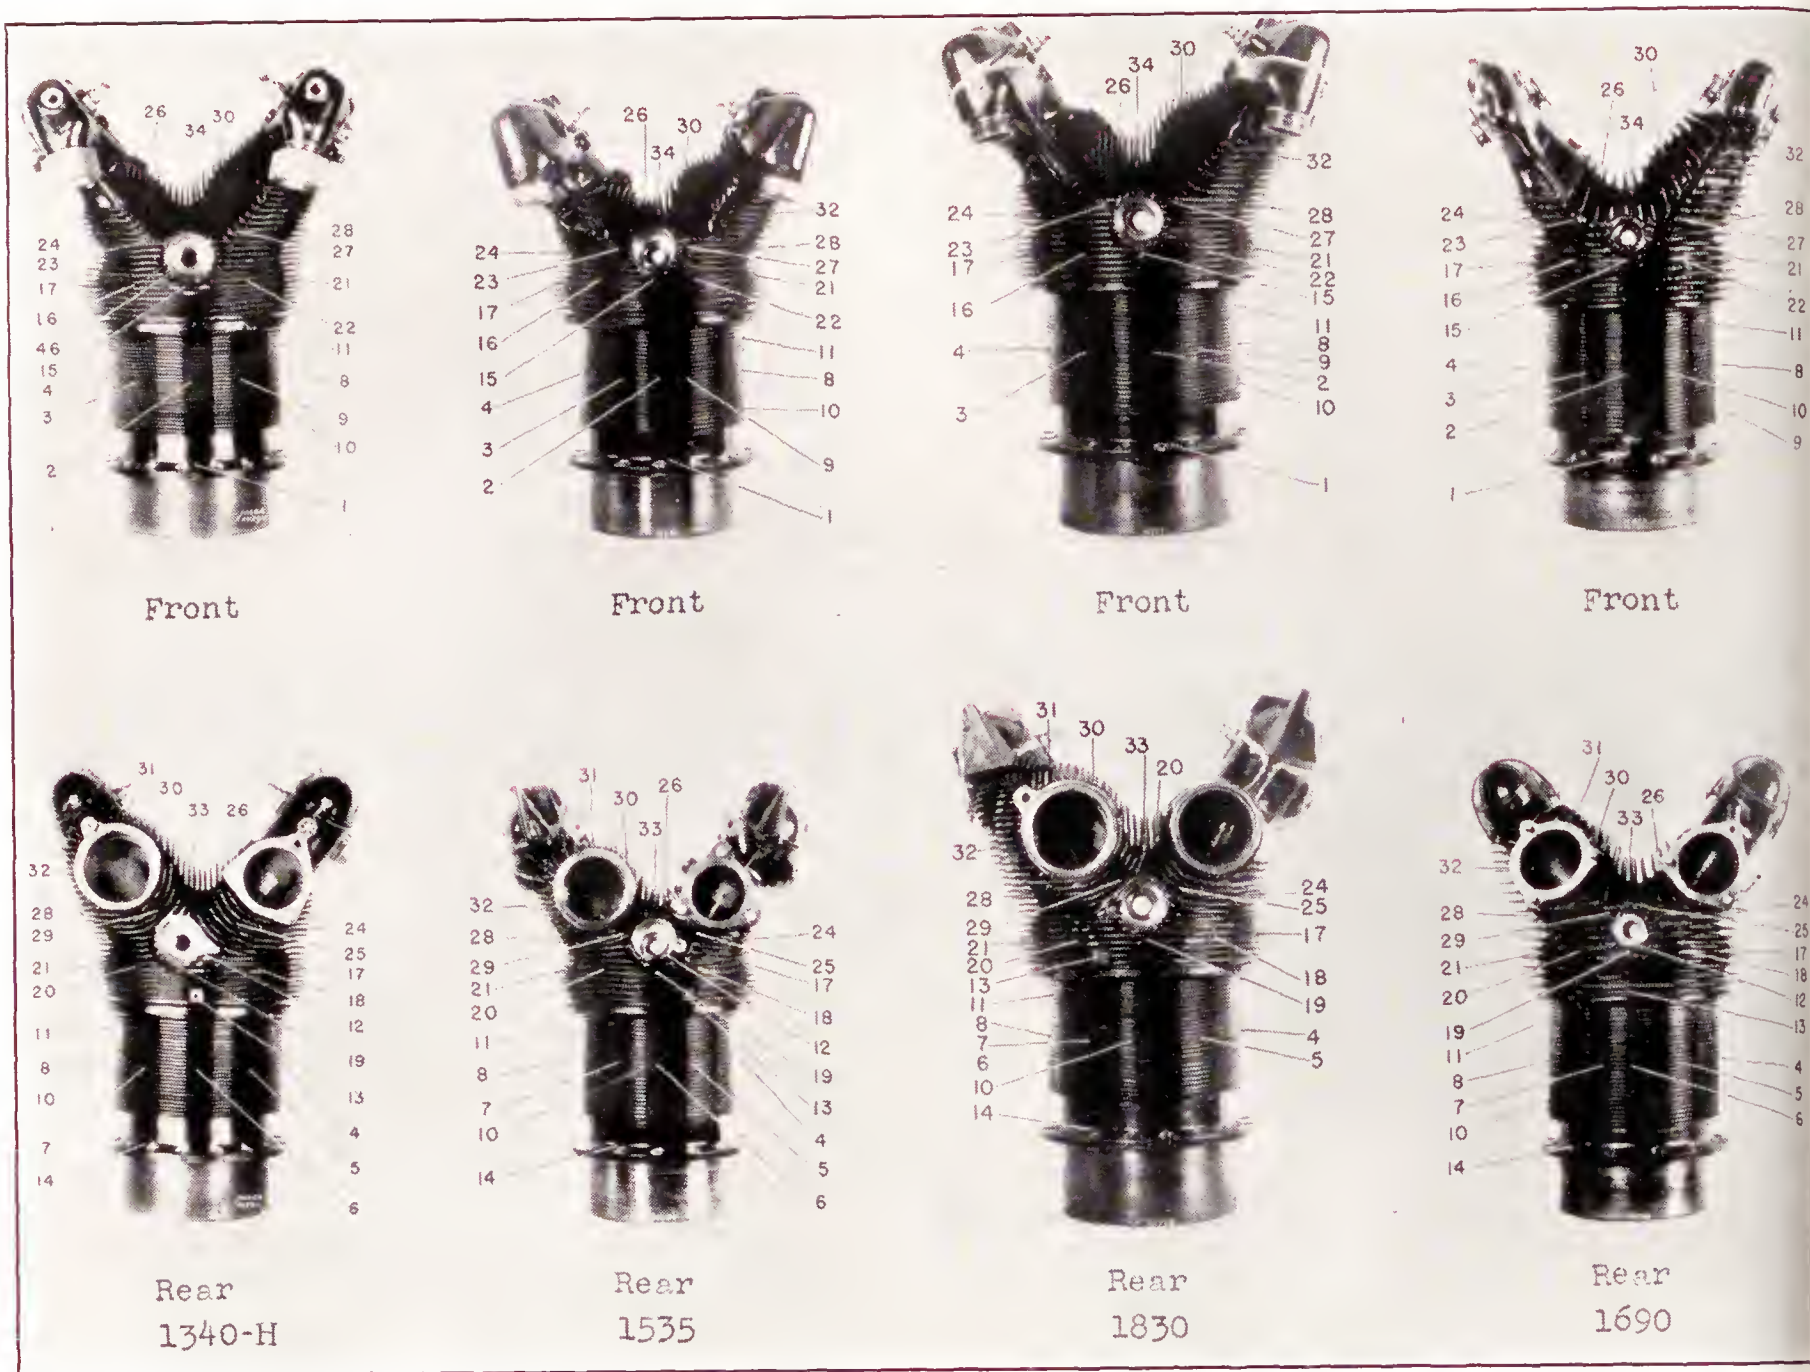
(a).—Front and rear views of cylinders from Pratt & Whitney engines showing location of thermocouples.
